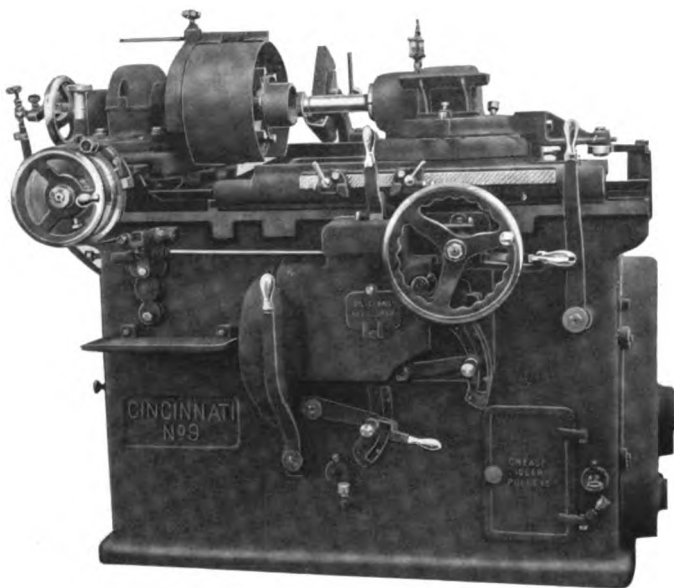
Front View Cincinnati No. 9 Internal Grinding Machine Arranged with Power Feed
